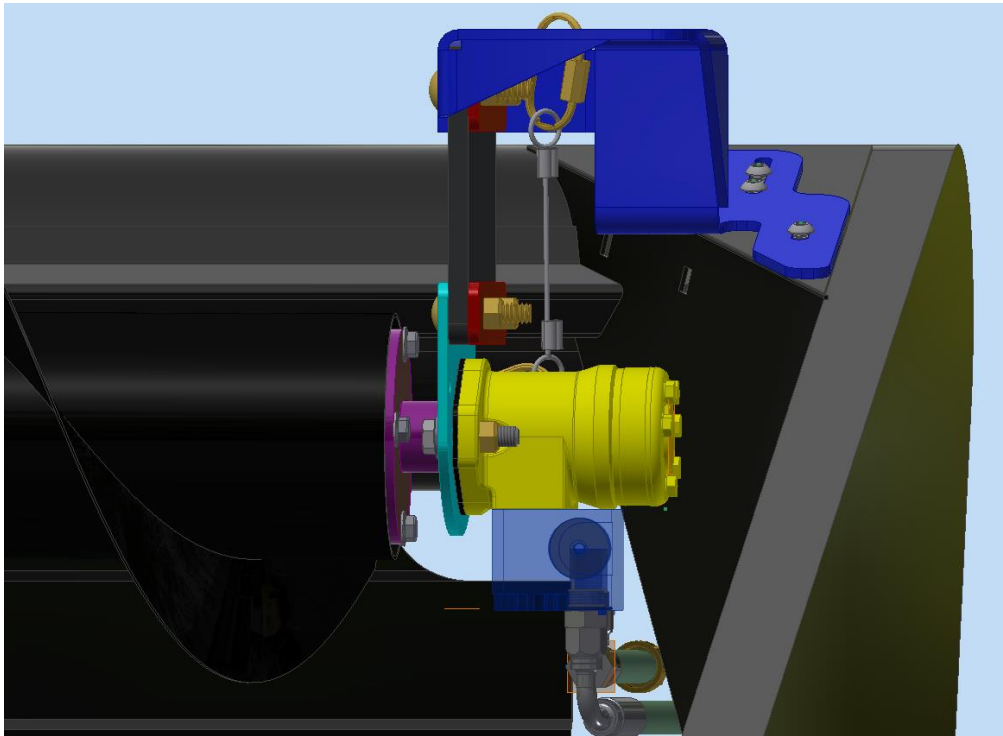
LH END FRONT VIEW MACDON FD KIT
